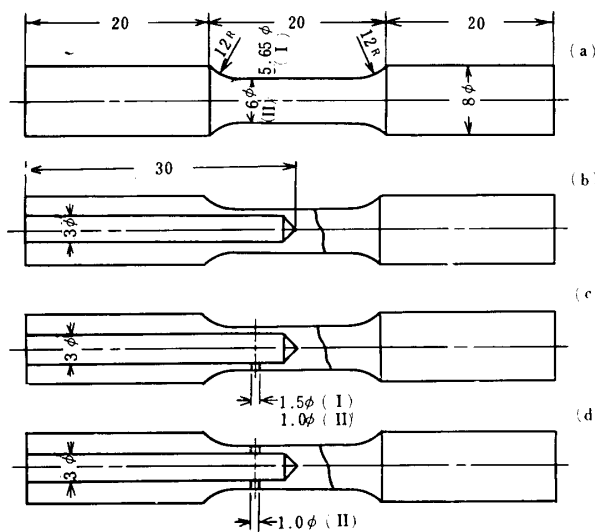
Dimension of test pieces of I, II material for 1.5kgm. fatigue testing machine
